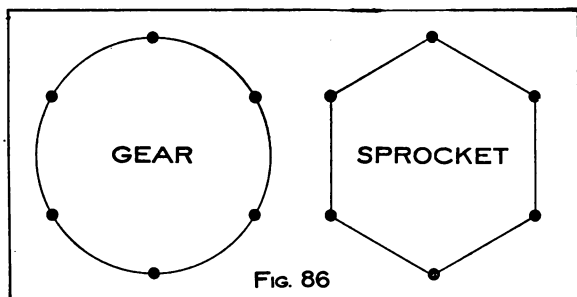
will illustrate the difference between circular and linear pitch, and help to demonstrate the case more clearly. The view at the left of the drawing shows the circular pitch and the view at the right the linear pitch of a gear or sprocket wheel respectively. If the circular pitch of the gear be one inch and the gear has six teeth as shown, the pitch diameter will be 6×0.3183 , which gives 1.91 inches as the pitch diameter. Let the linear pitch of the sprocket be
